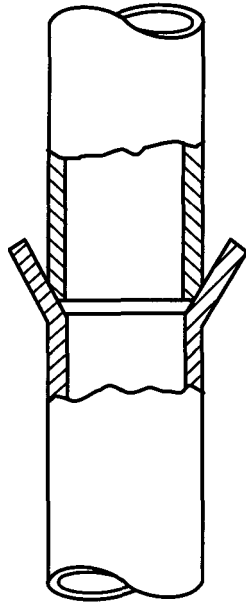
Cup Joint Design for Welding Lead Pipe in the Vertical Position
